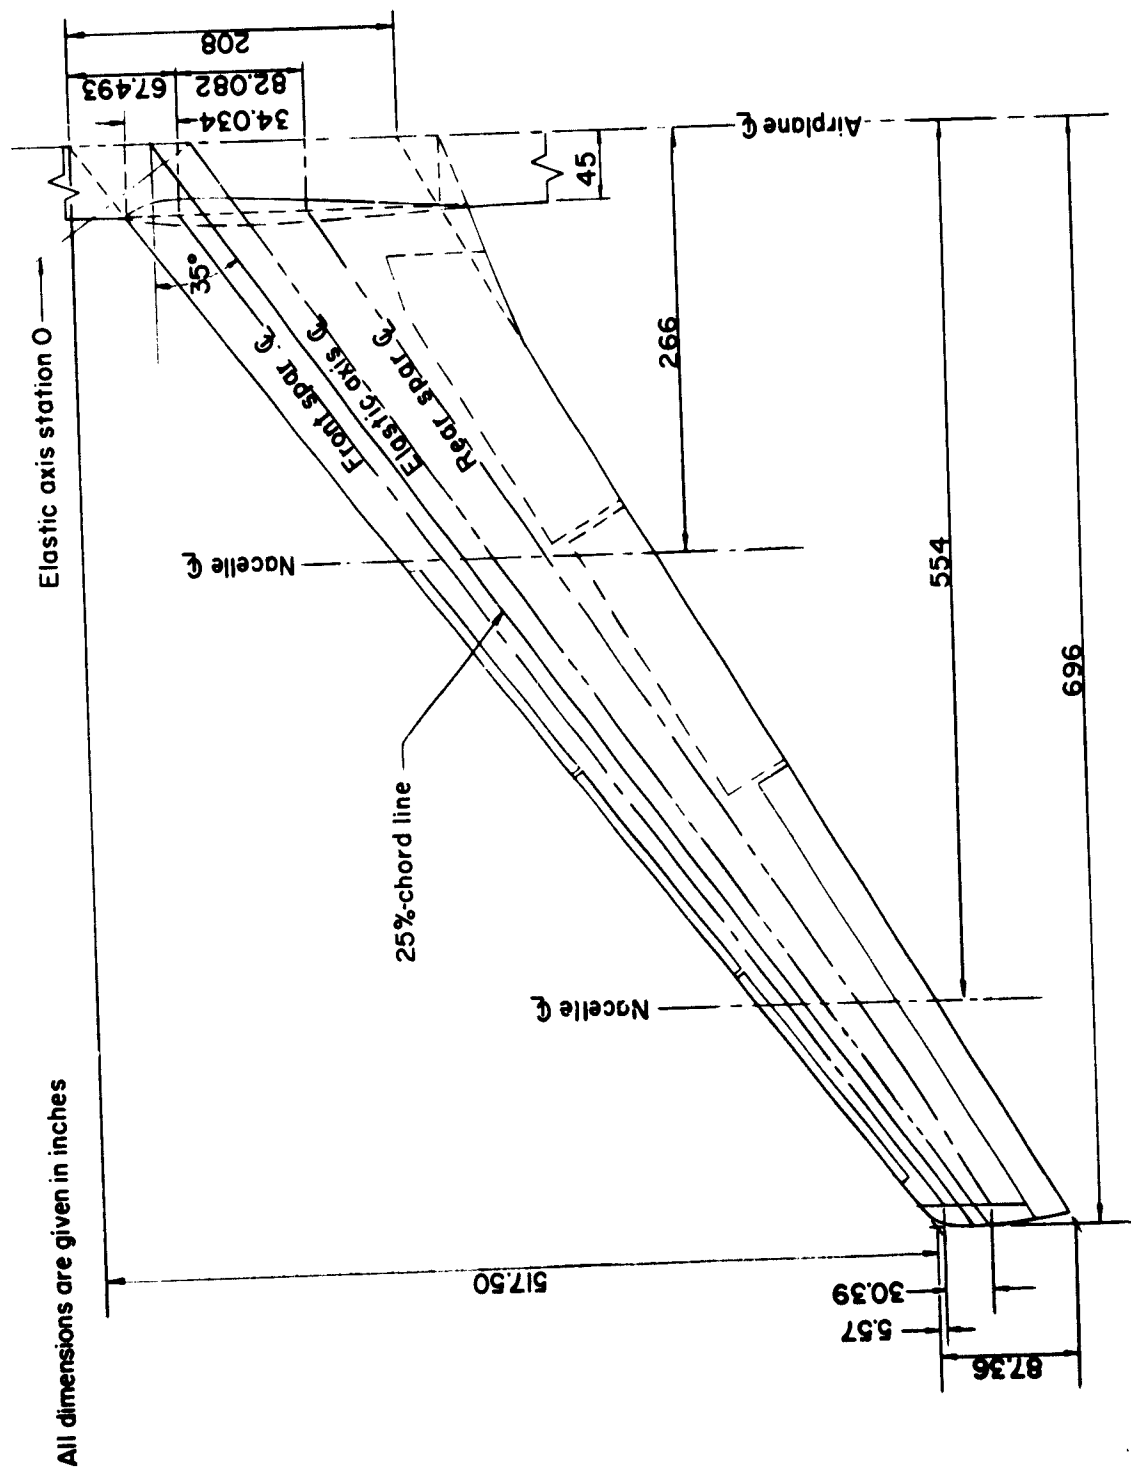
Wing plan-form geometry used in wing deflection calculations.
